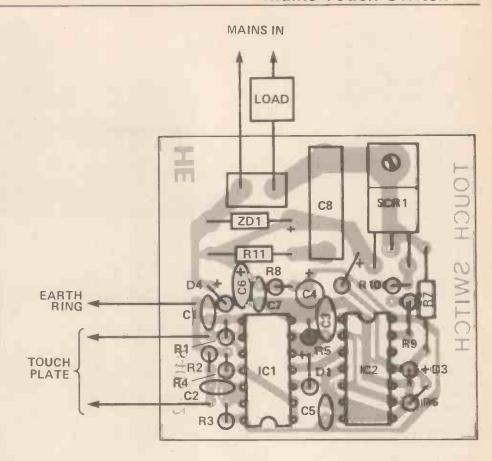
The component layout. There are many polarity components, so component orientation should be double-checked before connection.
